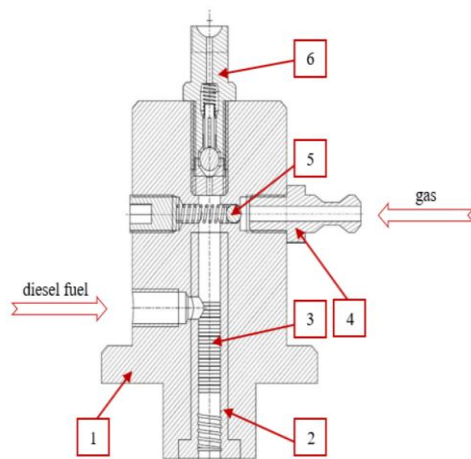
Delivery section of pump: 1 – body of the delivery section, 2 – cylinder, 3 – section labyrinth seal, 4 – gas stub pipe, 5 – one-way gas valve, 6 – one-way outlet valve [4, 6]
